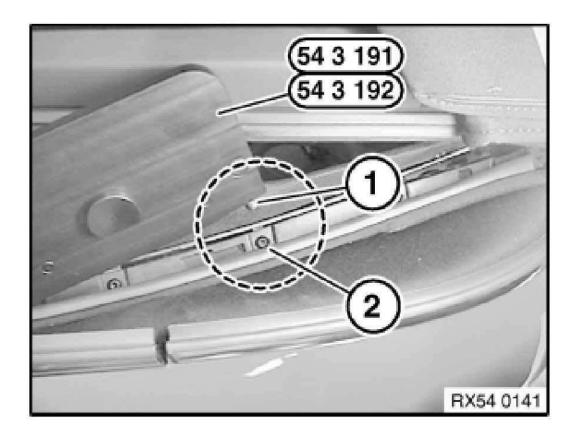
Inserting Locking Pin In Second Screw Head Courtesy of BMW OF NORTH AMERICA, INC.
